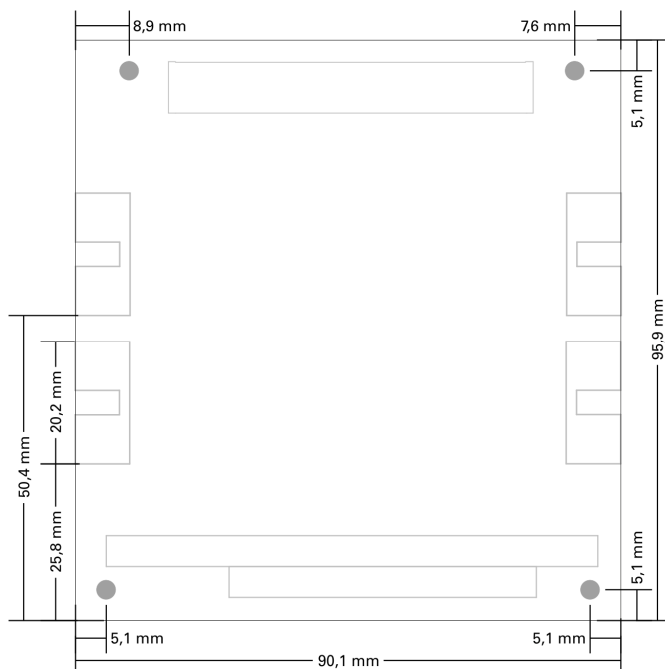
Dimension drawing PCAN-PC/104-Plus Quad.
